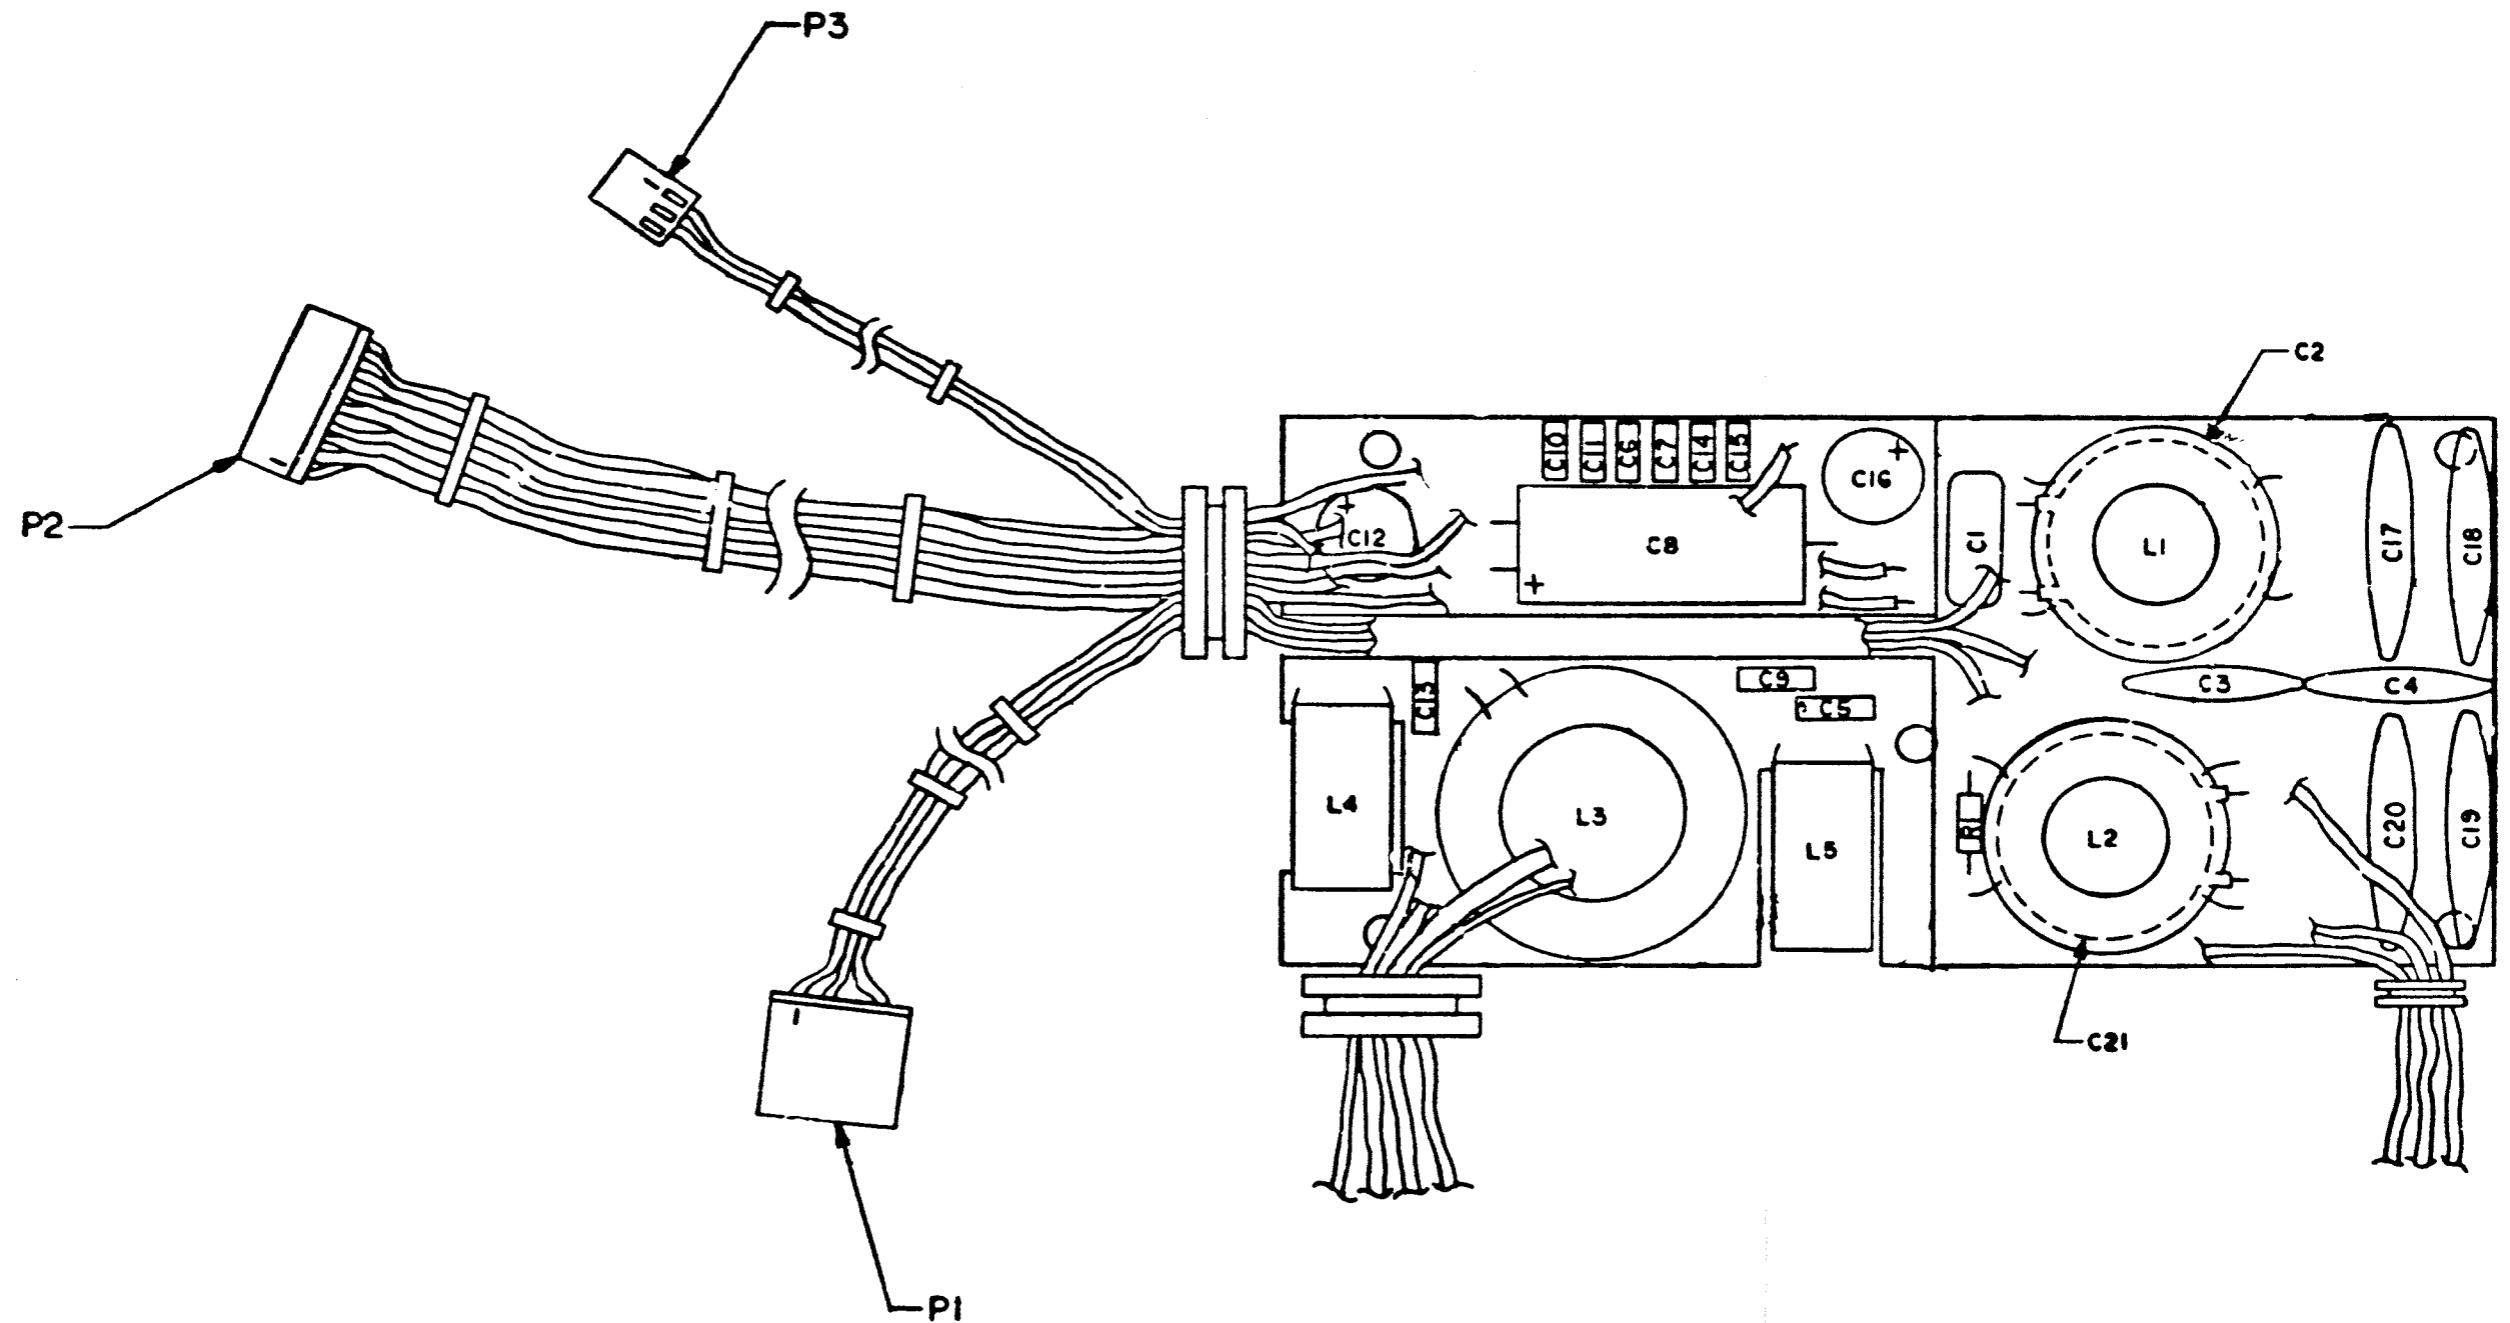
EMI Filter PWB Assembly A9A2A1
